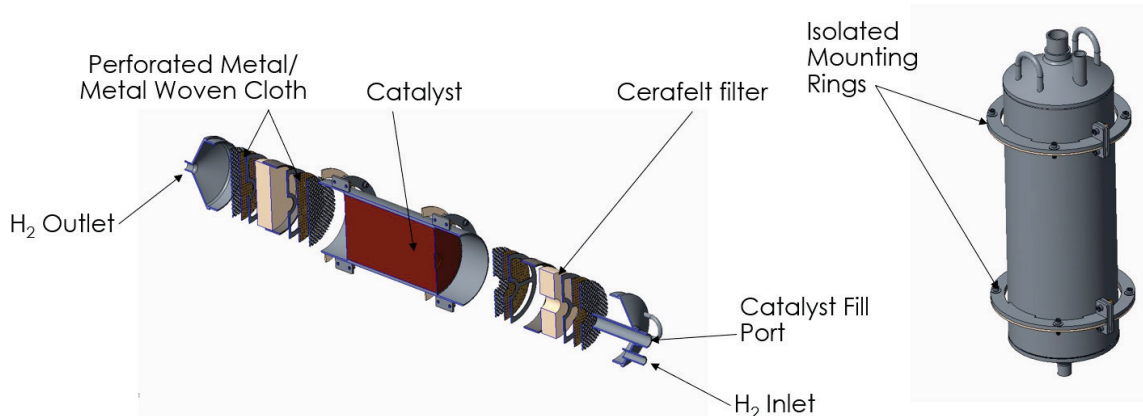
Sectional expanded view of the catalyst module design (5L version pictured).
